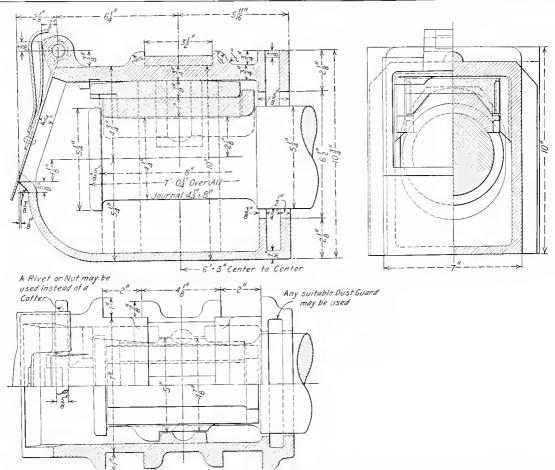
M. C. B. Standard Box and Contained Parts for 4¼ in. by 8 in. Passenger Train Car Journal. (M. C. B. Sheet 13.)
